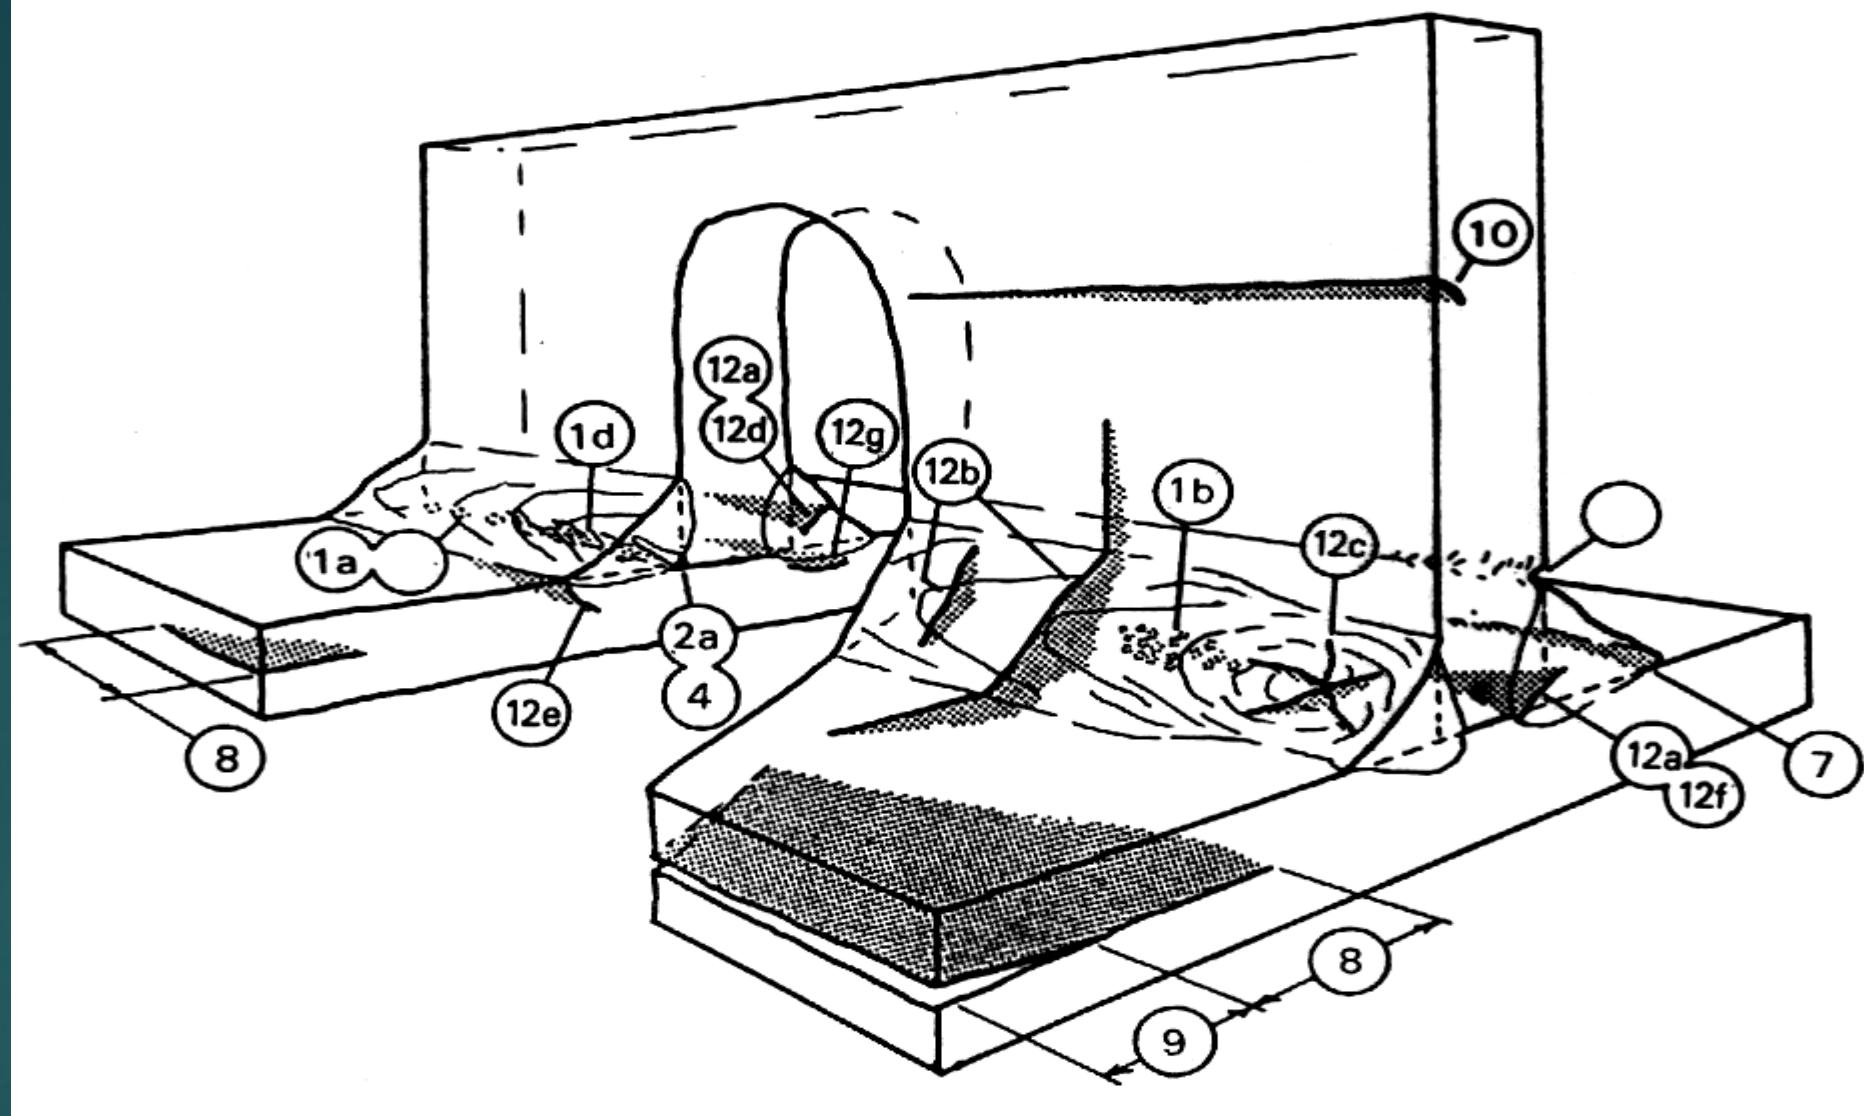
Single Pass Fillet Welds ins T-Joint
